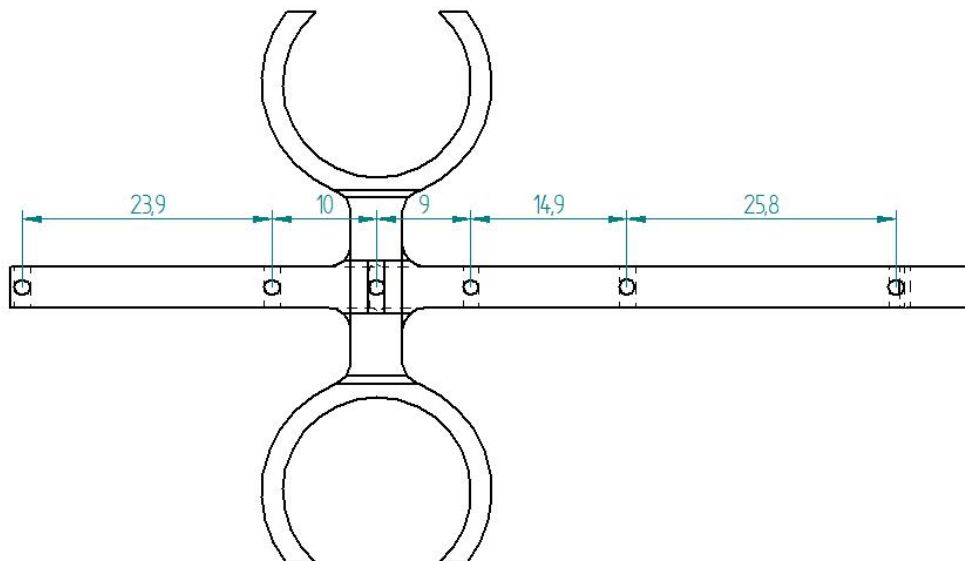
top view with dimensions of the support – quotas in [mm]
